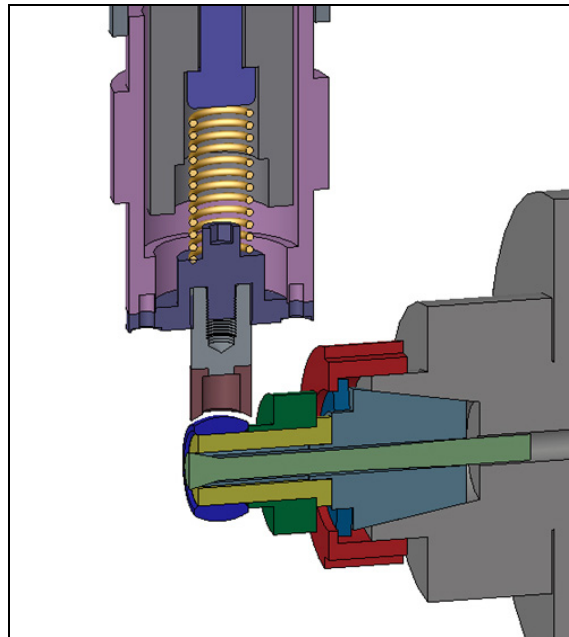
Sectioned model of Elid 3 superfinishing machine / setup at NMB
